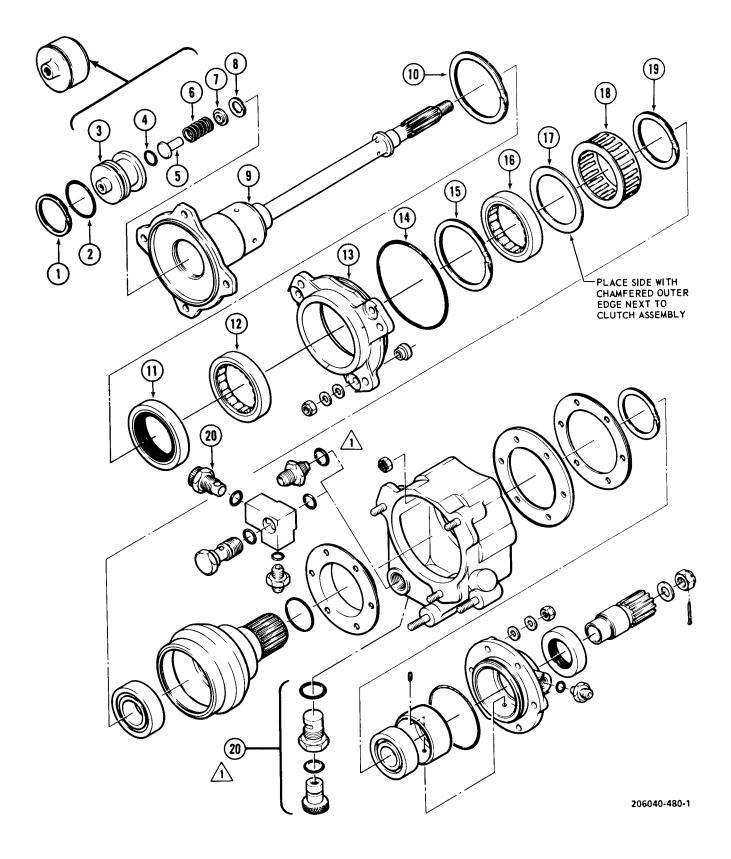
Freewheeling Assembly – Exploded View (Sheet 1 of 3)
